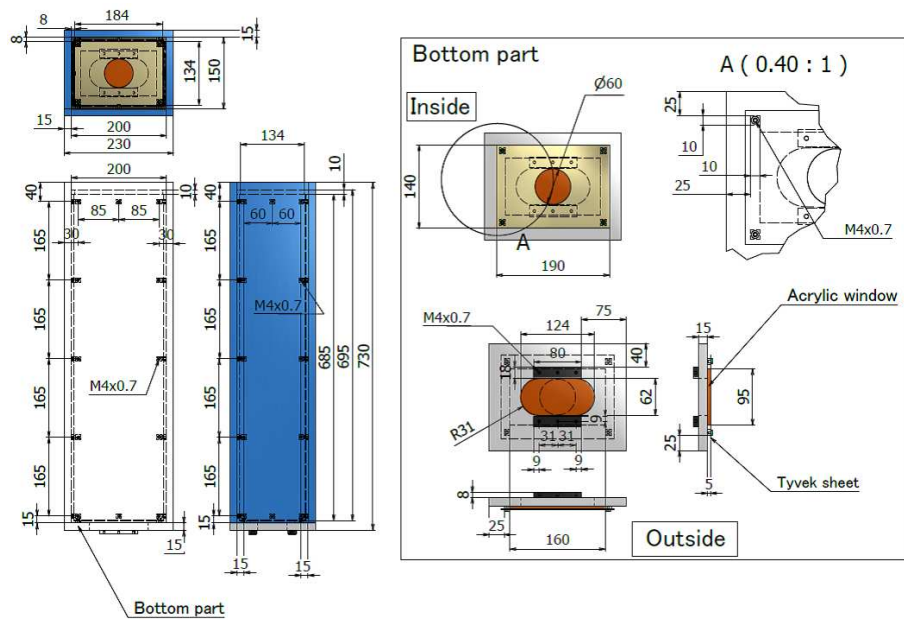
A drawing of the container box of new prototype water Čerenkov detector. The unit is mm.
